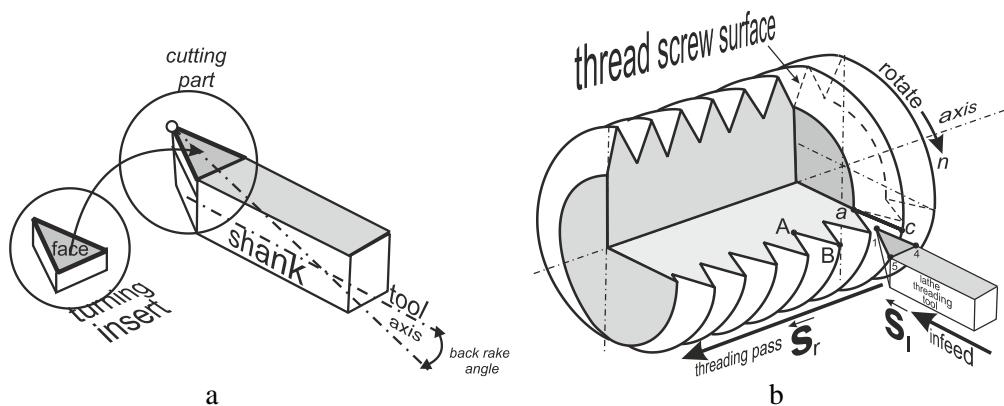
Schema of lathe tool with turning insert (a) and threading using it (b)
